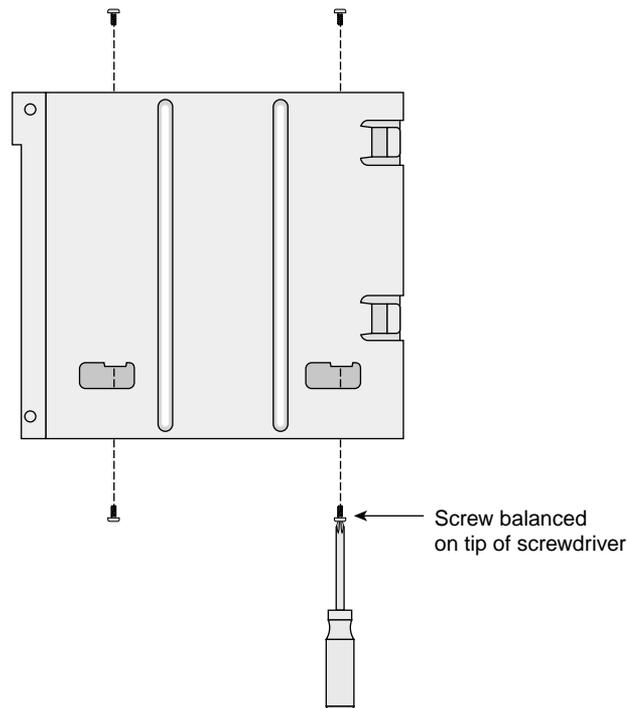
Securing the CD-ROM drive to the Drive Module
